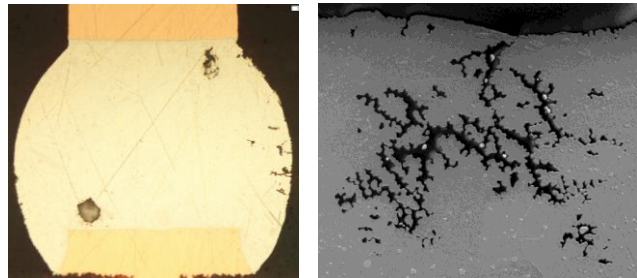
Hot Tear in the bulk solder of a BGA solder joint and an exposed Pad solder joint.
